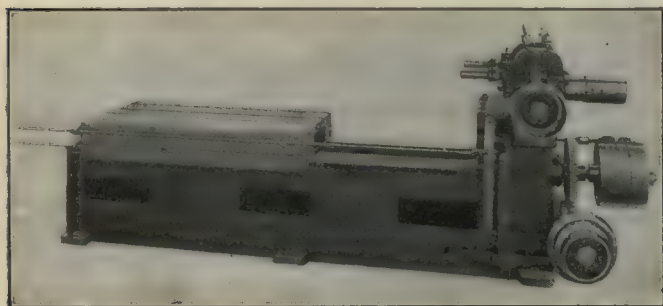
MOLINE NO. 4 HORIZONTAL BORING MACHINE
